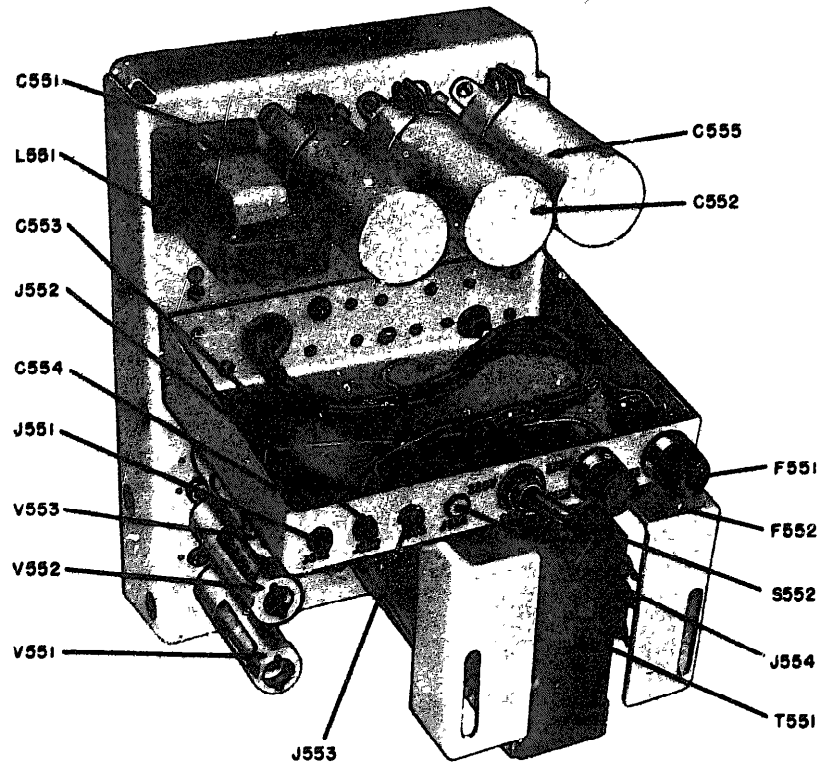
Power supply bracket assembly, top view, circuit element location diagram.
